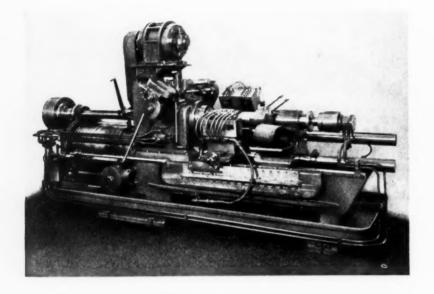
Rough-turning the Outside of Forged 0.40 Per Cent Carbon Chrome-molybdenum Steel Airplane Engine Cylinder Barrels, Having a Maximum Hardness of 187 Brinell, on a Fay Automatic Lathe. Length of the Barrel is 11 Inches; Outside Diameter, 8 5/8 Inches; and Forged Hole Diameter, 5 3/4 Inches
